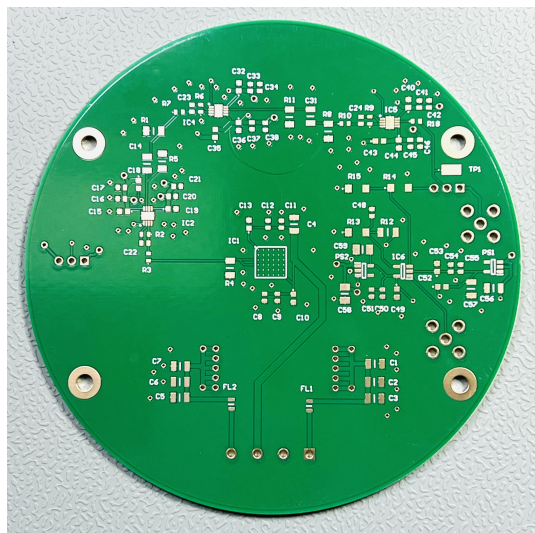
Unsoldered manufactured PCB of the UWOCs receiver.
